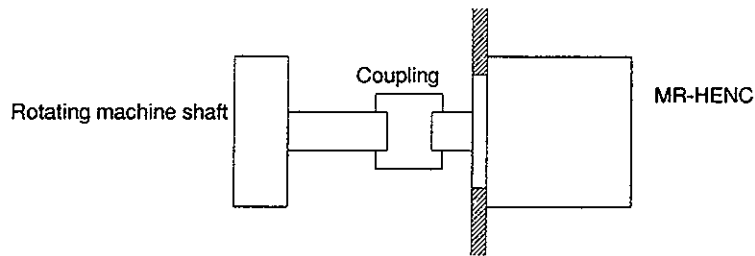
Connecting the Encoder to a Machine Shaft
